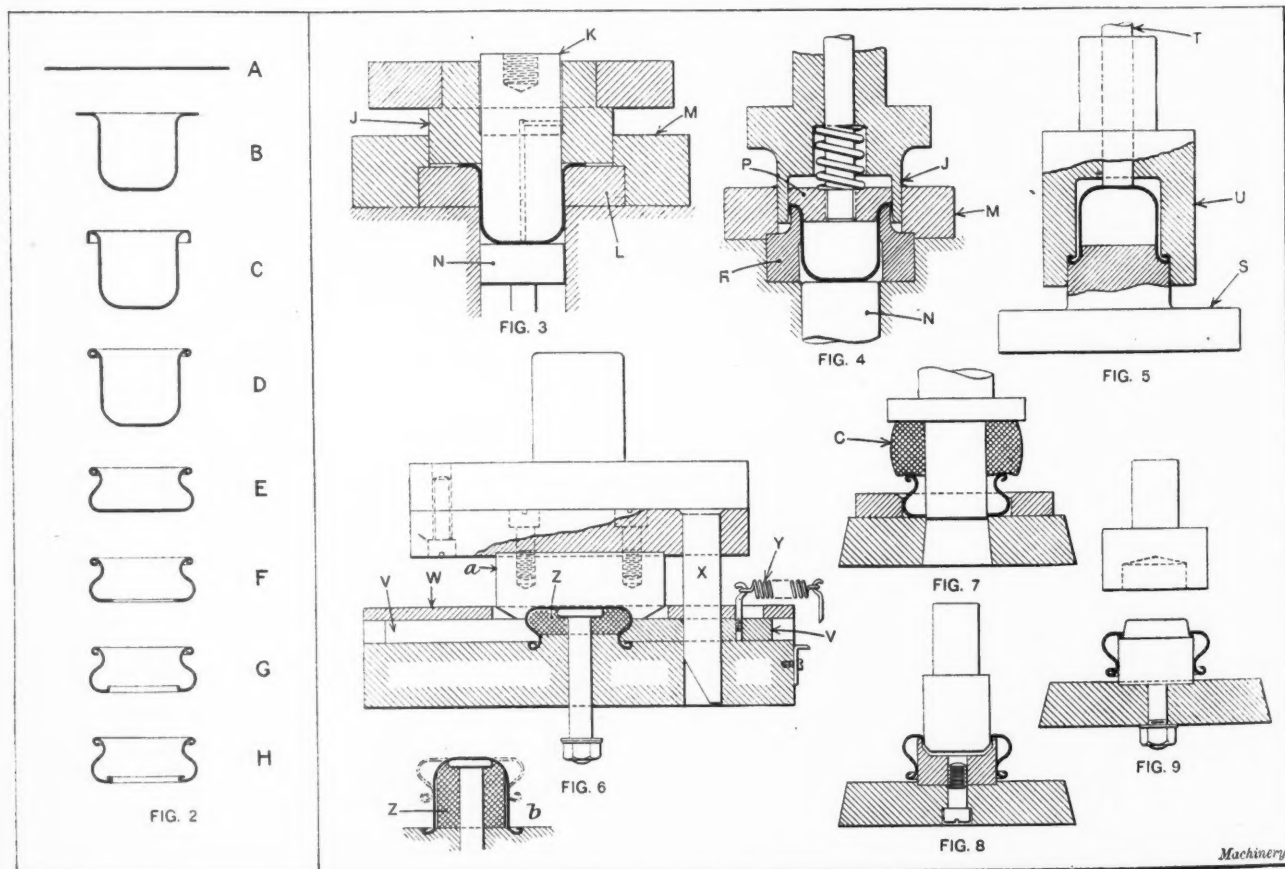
Sequence of Operations. Fig. 3. Blanking and Drawing Die. Fig. 4. Tool for trimming Flange and preparing it for the Curling Operation. Fig. 5. Curling Die. Fig. 6. Bulging Tool using Rubber Pad. Fig. 7. Die for piercing the End of the Mouth-piece. Fig. 8. Operation preparatory to Beading. Fig. 9. Final Beading Operation
